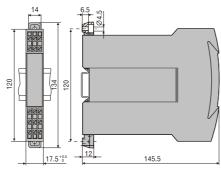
in housing S17 screw hole mounting brackets pulled out.
